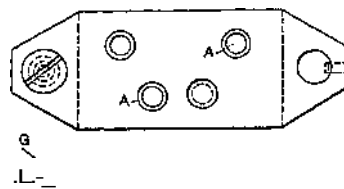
Simple Form of Closed Jig for Drilling Work shown in Fig. 1
